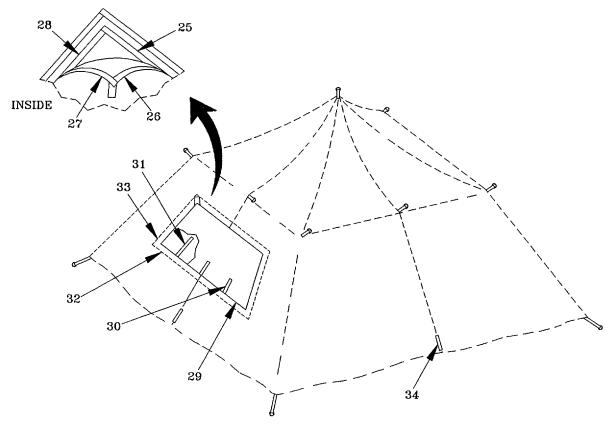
LINER ASSEMBLY (Sheet 2 of 2)
